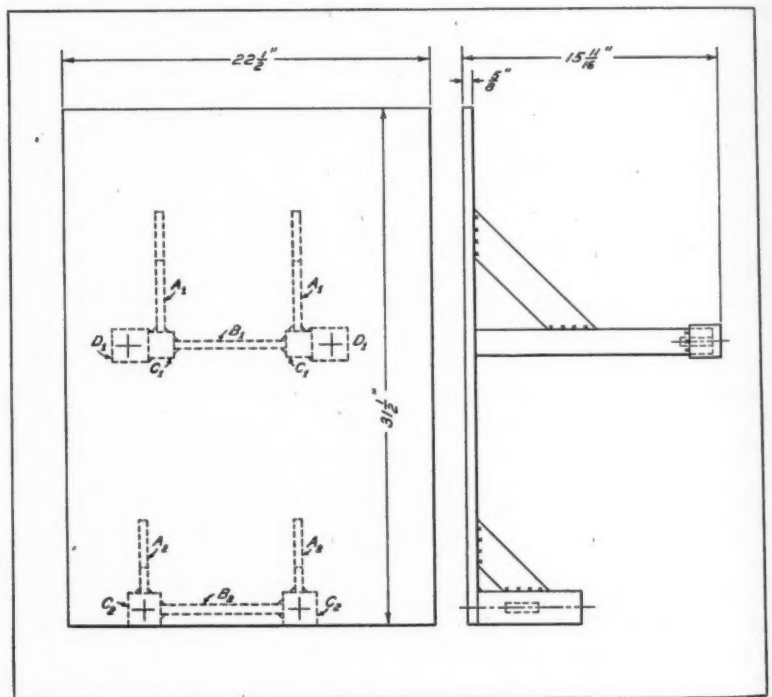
Final Method of Fabricating the Motor Base Using Welded Sub-assemblies
